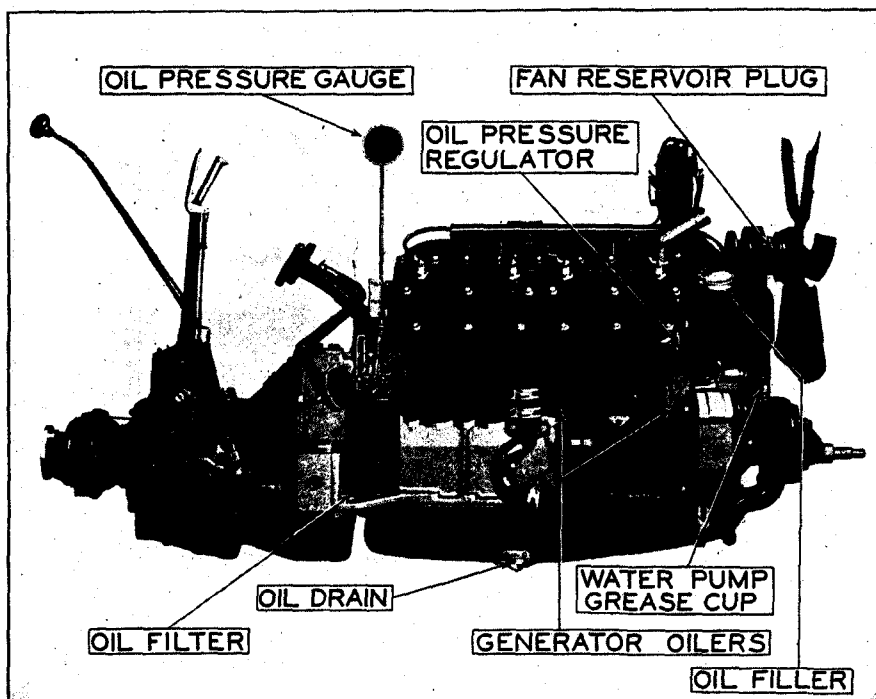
Showing the Location of the Oil Filler, Oil Level Indicator, Oil Pan Drain Plug and other Lubrication Features
